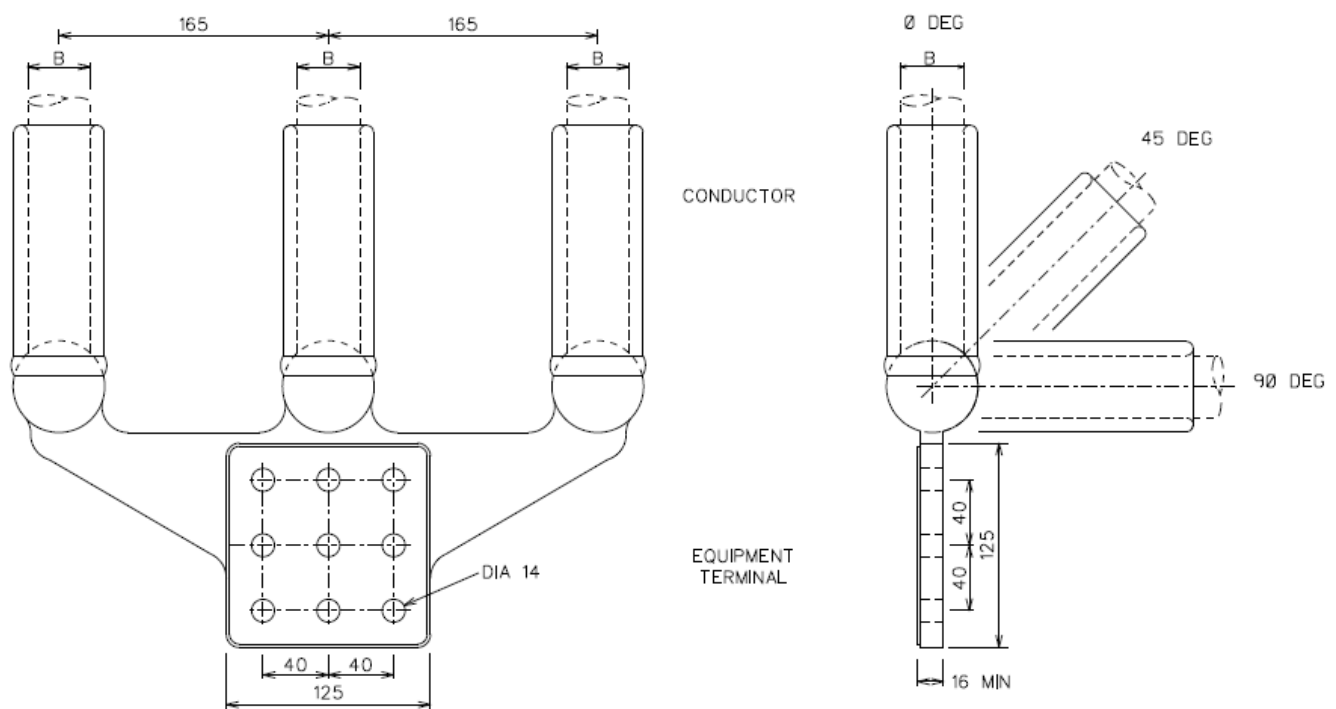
EYC3 Bolted/Compression Clamp for 9-Hole Pad Connection
